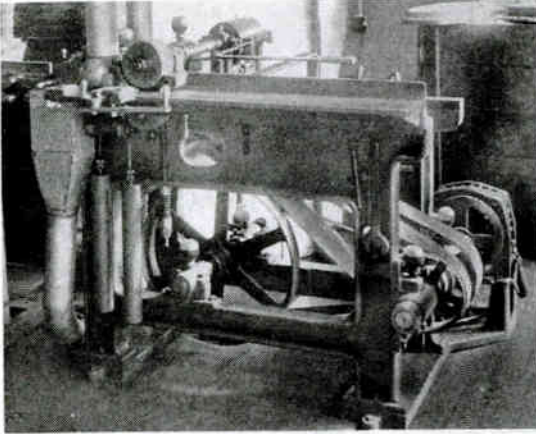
5 H.P. Induction Motor Driving Spline Cutting Machine
